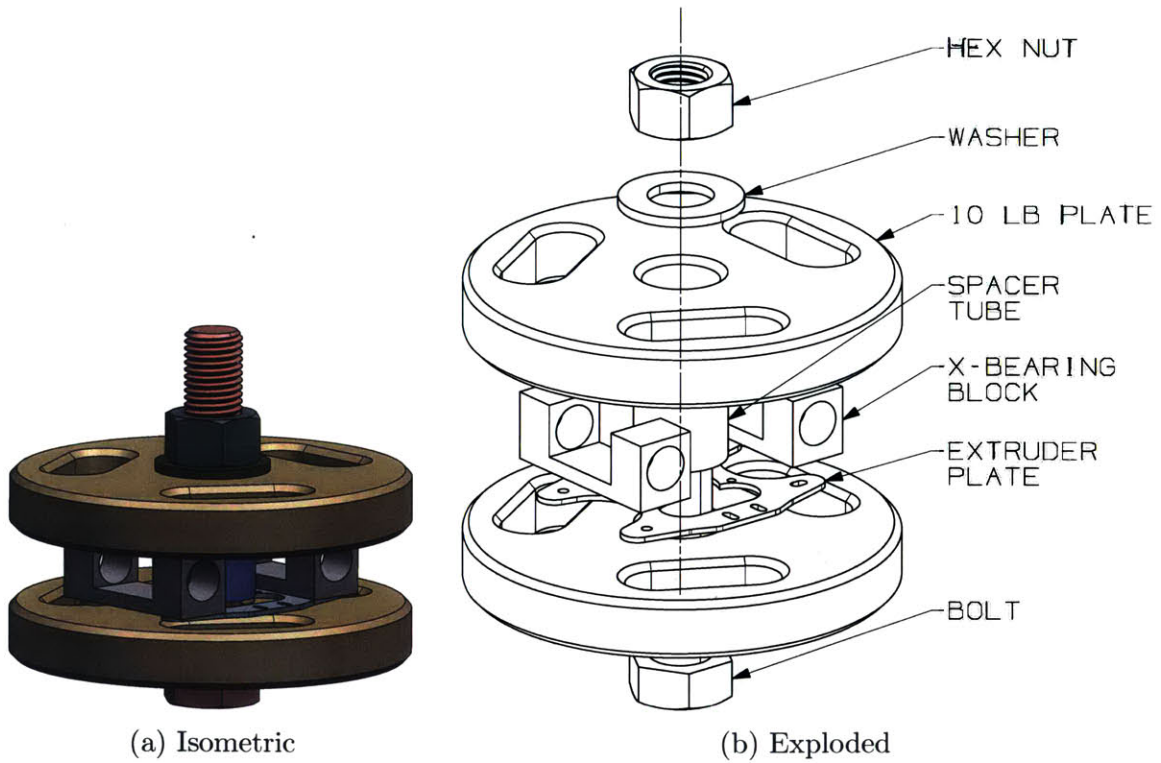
CAD layout of mounting configuration for additional system loading.
